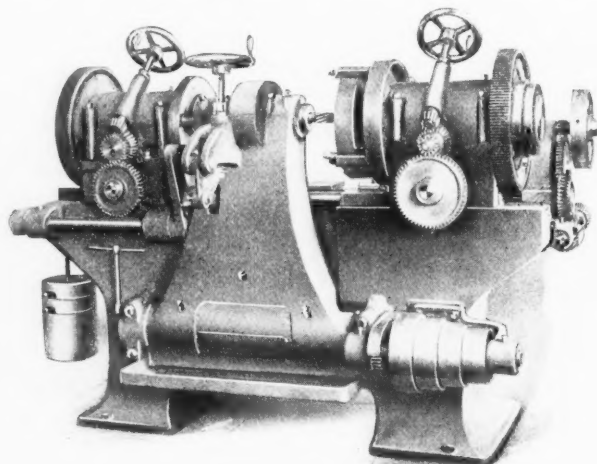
Rear View of Cam Cutting Machine, showing Spindle and Forming Roll Support.
